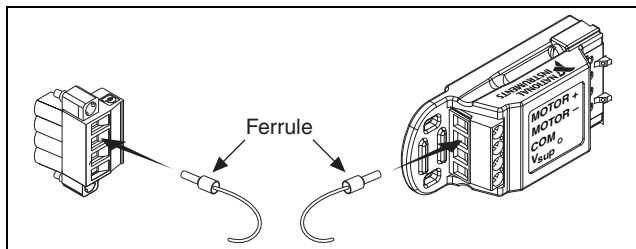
4-Terminal Screw Terminal Connector or Accessory with a Ferrule
